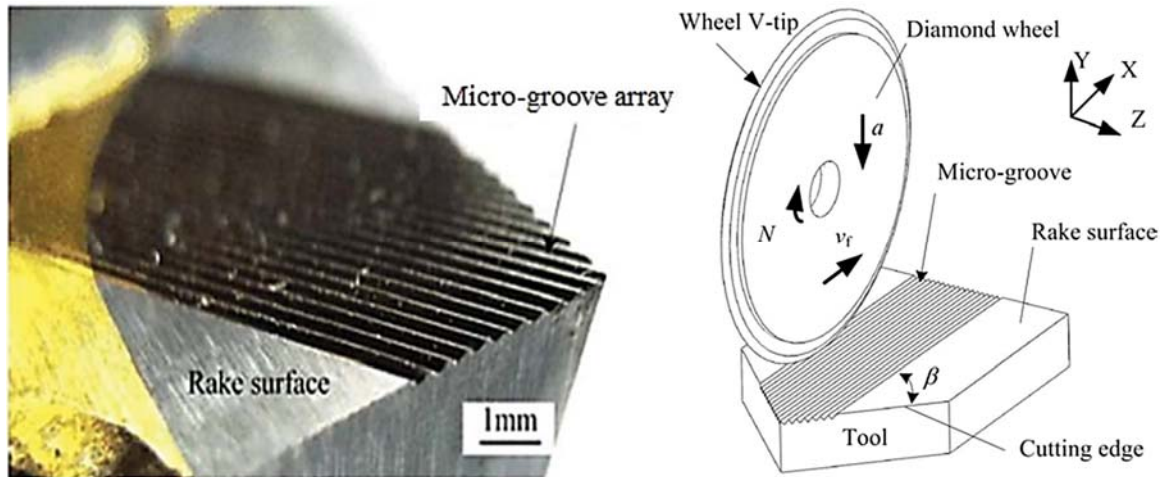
(Left) Micro-grooved tool created by micro grinding process (Right) Micro-grinding of micro-groove array on tool rake surface (Xie et al., 2012)
